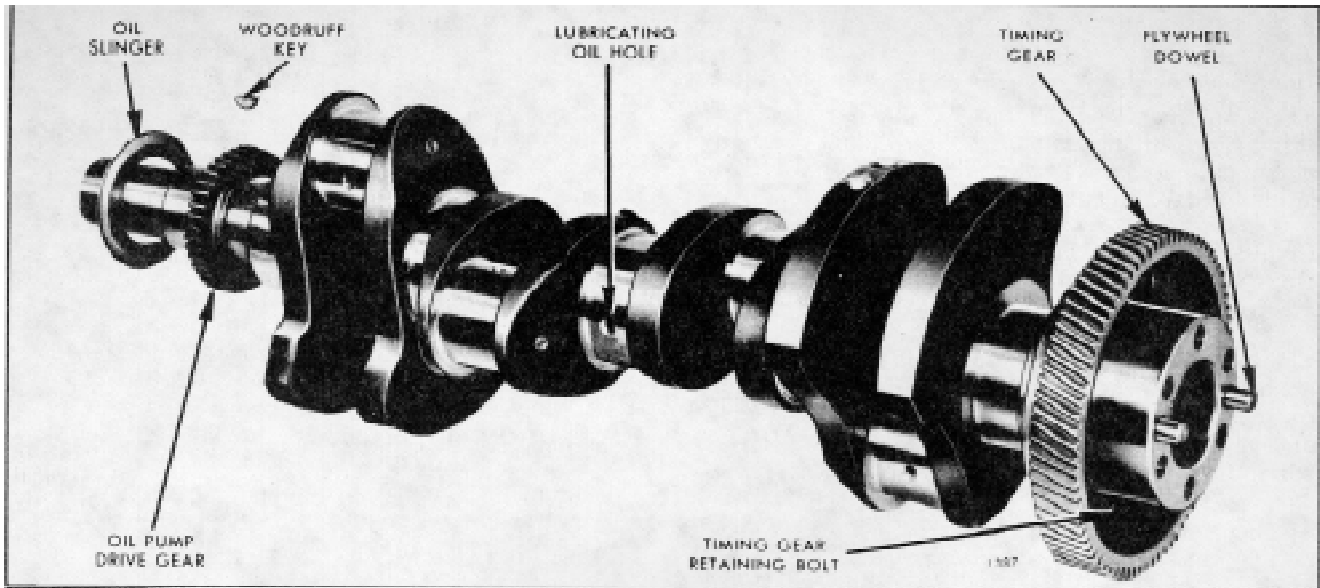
Crankshaft, Timing Gear and Oil Pump Drive Gear Assembly - Four Cylinder Engine
